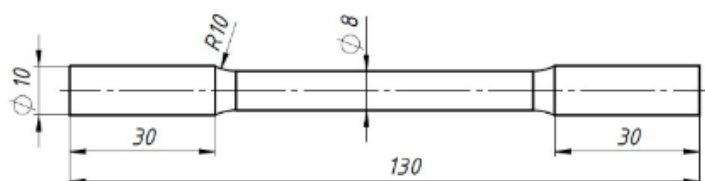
Shape and measurement of the tensile test specimens (TSE 138)
